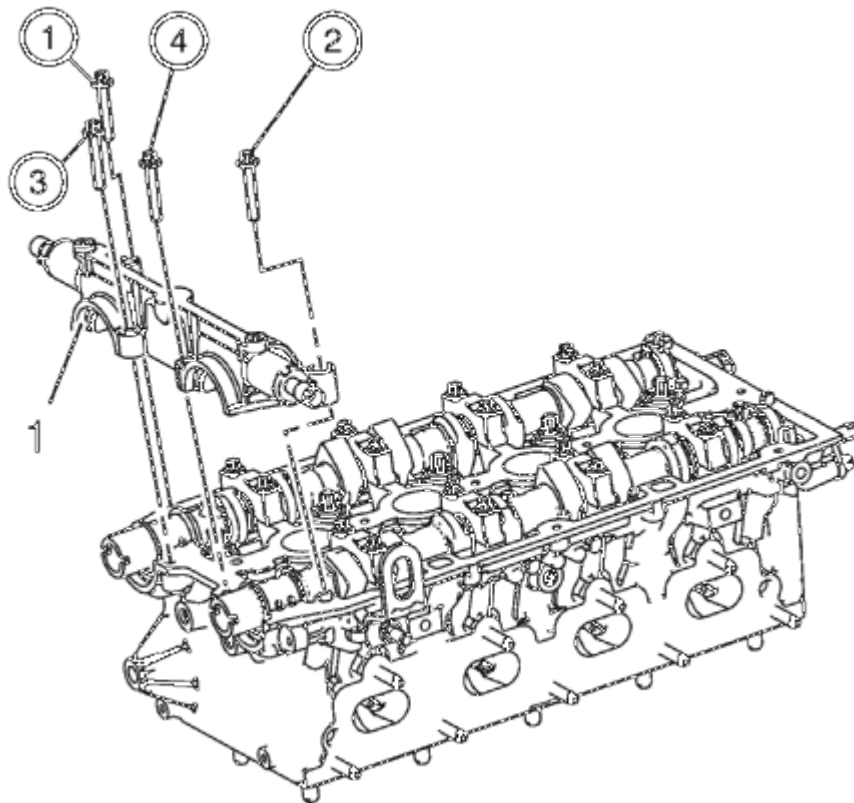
Camshaft Bearing Cap And Camshaft Bearing Cap Bolts Removal Sequence
